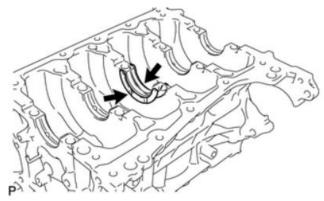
Remove Upper Crankshaft Thrust Washer
